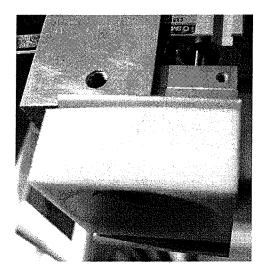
(Battery/Body Assembly Magnetic Pickup)
